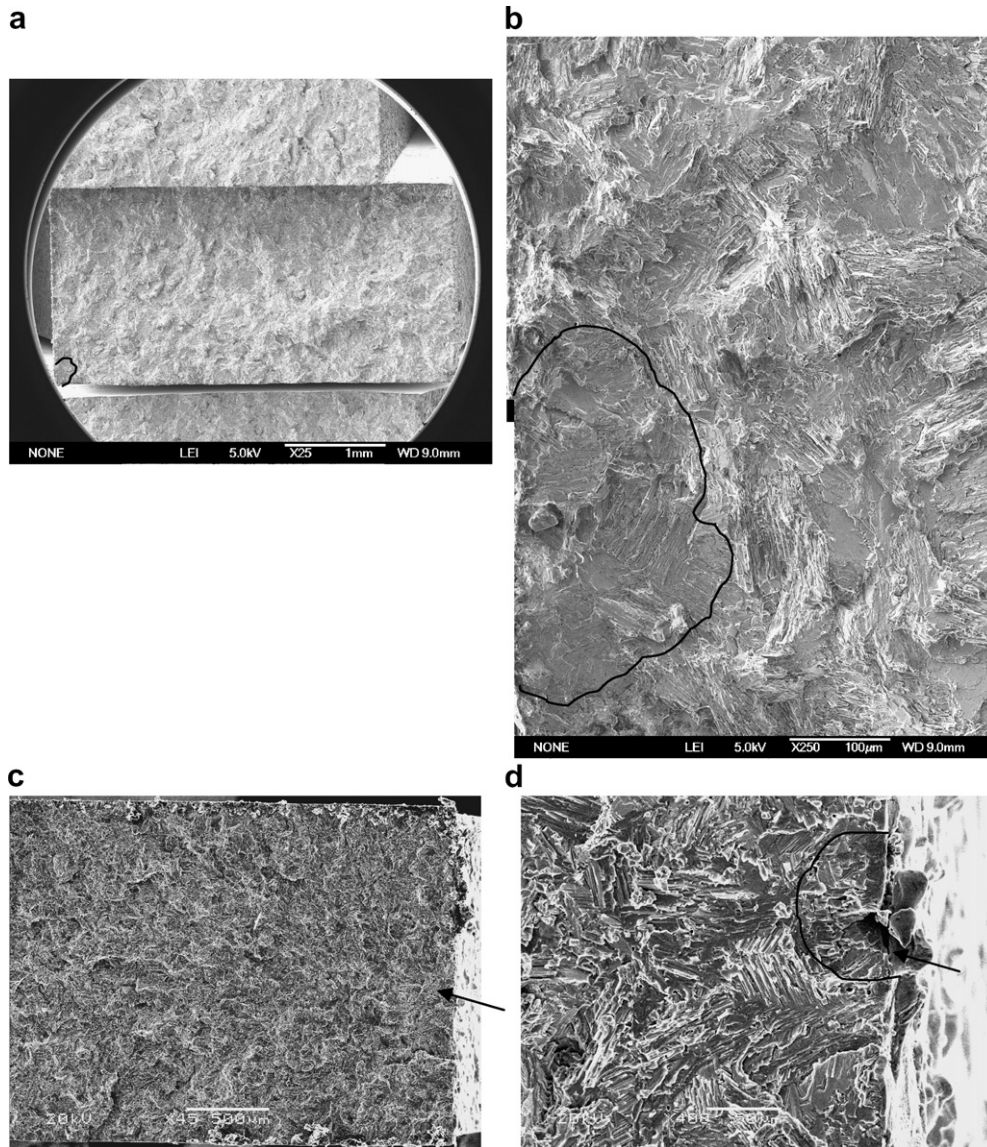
Fracture surface of tensile specimens. (a, b) Fracture surface of specimen B-T-01: (a) the black curve delineating the original critical crack and (b) a close view of the critical crack which triggered the cracking through the entire specimen. (c, d) Specimen B-T-05: (c) the black arrow showing the origin of cracking and (d) a close-up view of the original critical crack which triggered the cracking through the entire specimen.
